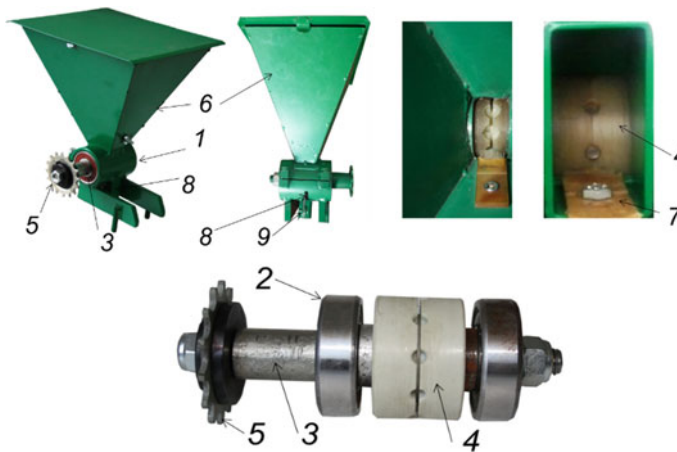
VPS 52/1 drum sowing unit: 1—body; 2—bearing; 3—driving shaft; 4—drum; 5—sprocket; 6—hopper; 7—brush; 8—ejector; 9—seed drill tube
